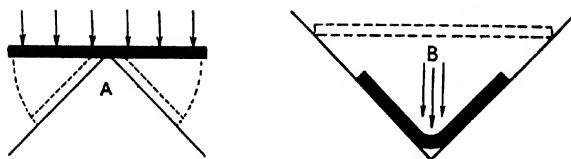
THE USE OF A FORMING BLOCK IN THE RUBBER DIE-PRESS TECHNIQUE
